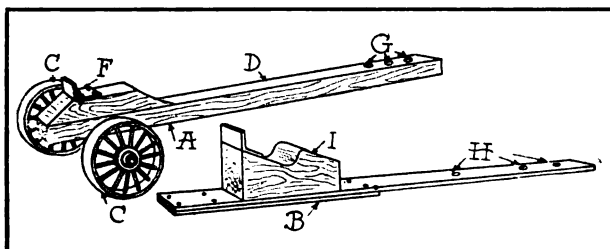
Diagram Showing How to Make a Simple Motor Ambulance.
